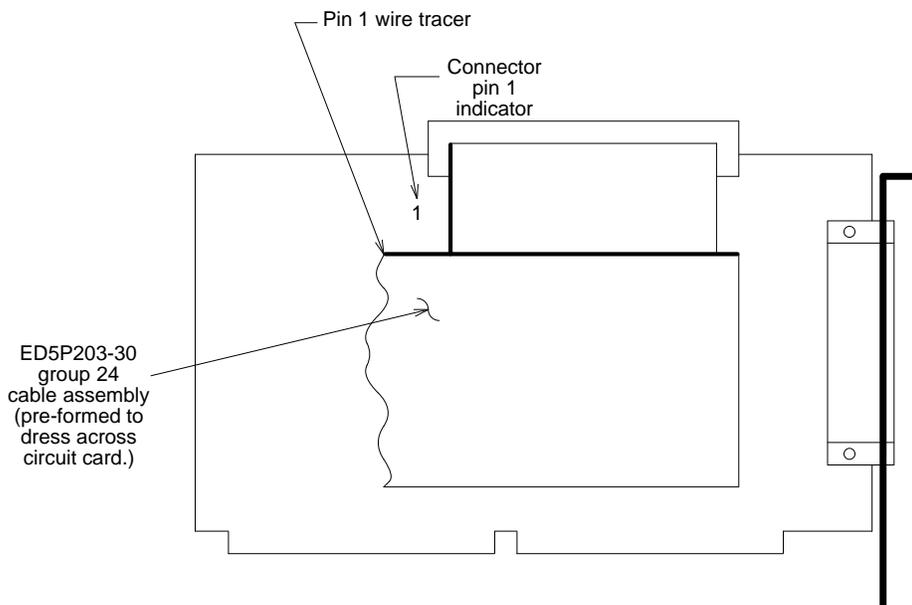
Cartridge Tape Interface Cable Pin Connections
